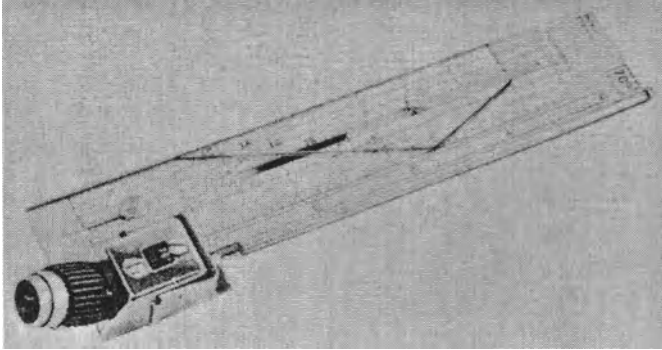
Flaw-locating rule for weld testing, design Krautkrämer
